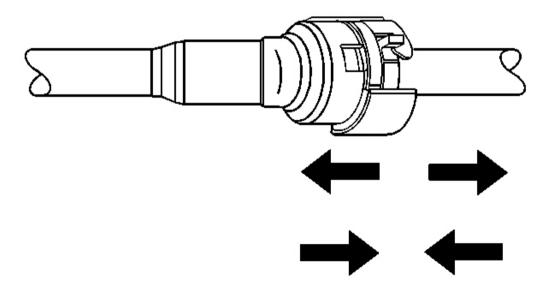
Ensuring Secure Connection Courtesy of GENERAL MOTORS CORP.
